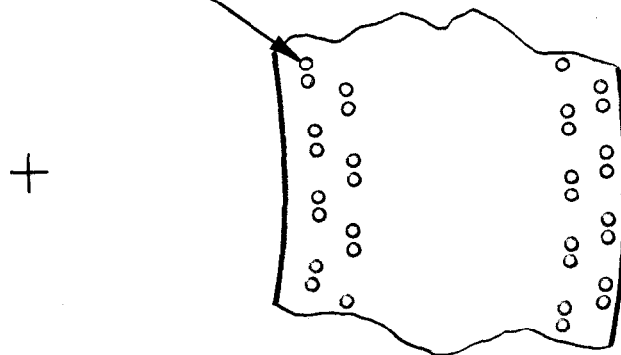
Metal Membrane Center Reinforcing Ring Weld Details.
